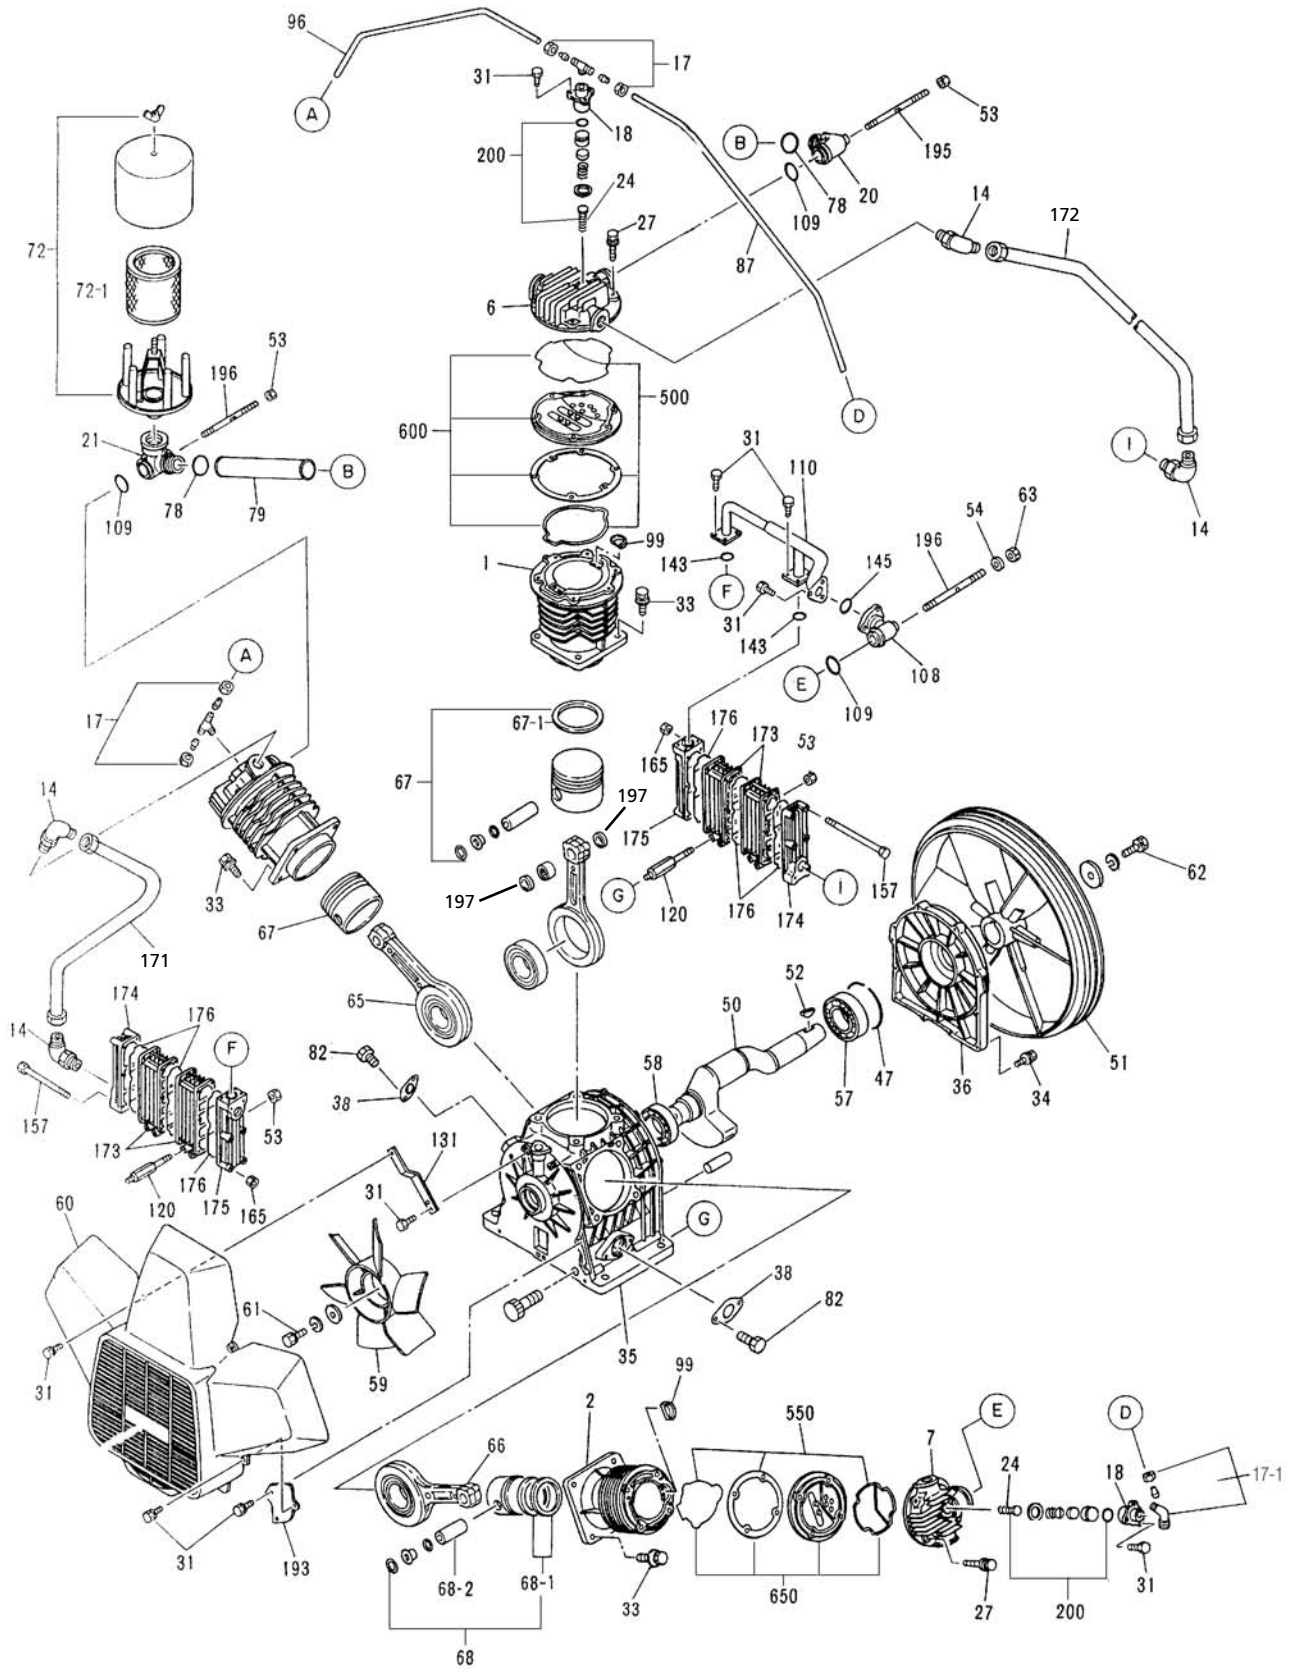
Replacement Parts Illustration for OPT100 and OPT150
